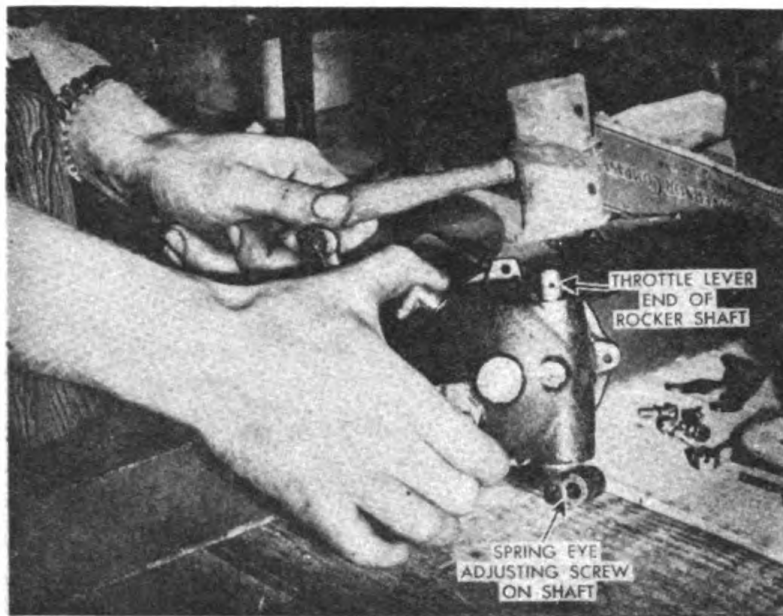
Driving out Rocker Shaft with Raw Hide Mallet.
